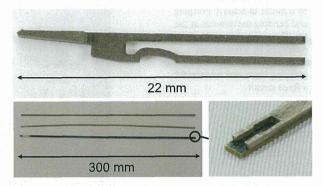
Upper panel shows the fabricated spring blade. Two spring blades are fixed to the end of a rigid link bar to transmit the force from the handle mechanism, as shown in the lower panels
